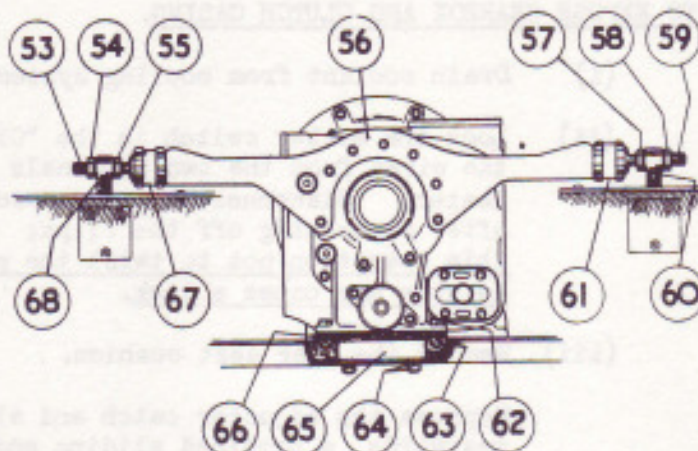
ENGINE AND GEARBOX REAR SUPPORT.
